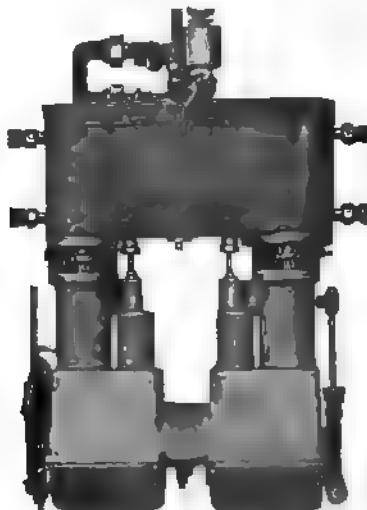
Compound Engine of the Stearns Steam Carriage.
